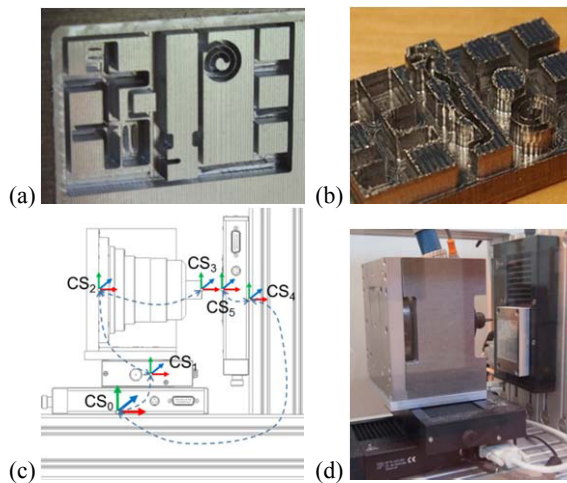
(a) machined features manually programmed; (b) features machined by primary MATLAB-based CAM interpretation; (c) machine model; (d) micro milling test rig
